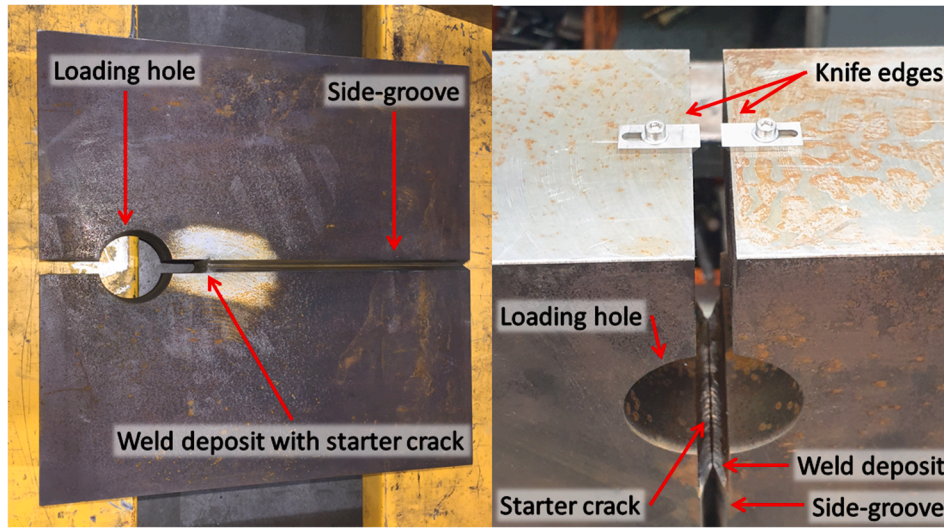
Example of CCA specimen showing the weld bead and machined starter crack.
